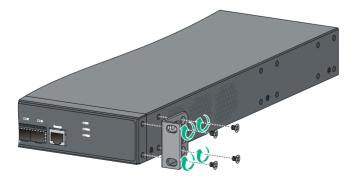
Attaching a four-hole mounting bracket to the rear mounting position on an HPE 5130 24G SFP 4SFP+ El switch
